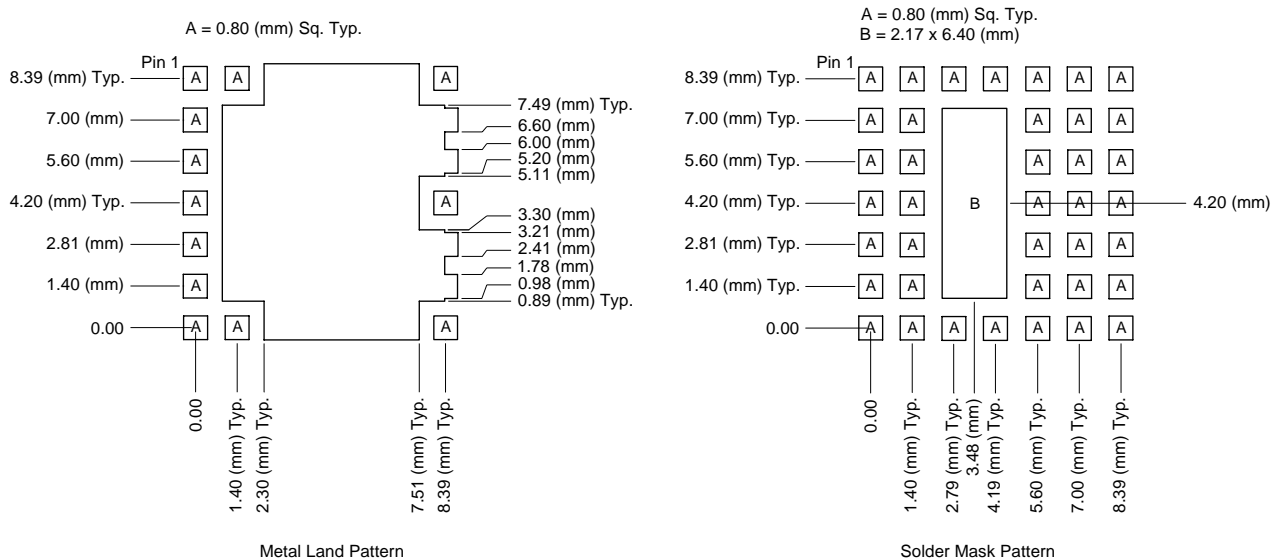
PCB Metal Land and Solder Mask Pattern (Top View)
